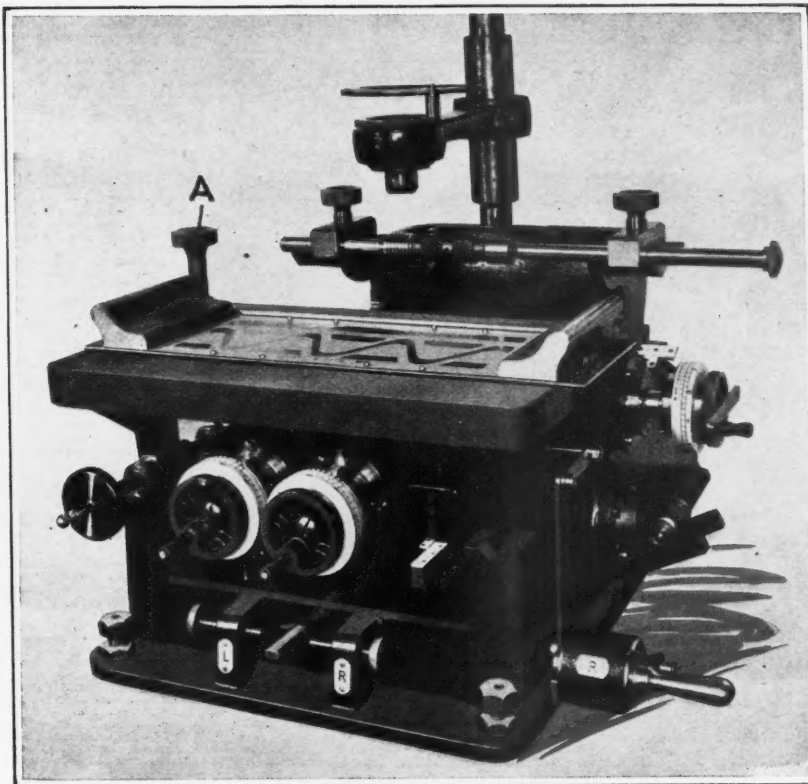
Vertical Projector for examining the Form of Screw Threads
